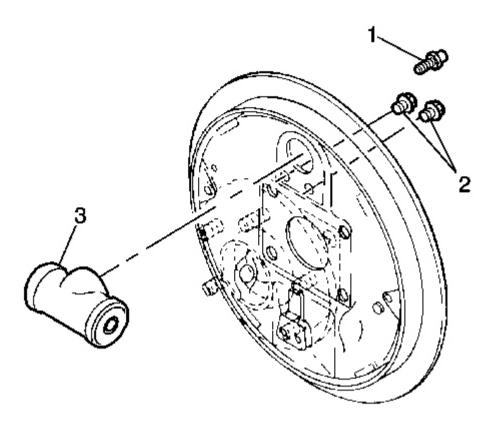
Exploded View Of Wheel Cylinder Courtesy of GENERAL MOTORS CORP.
